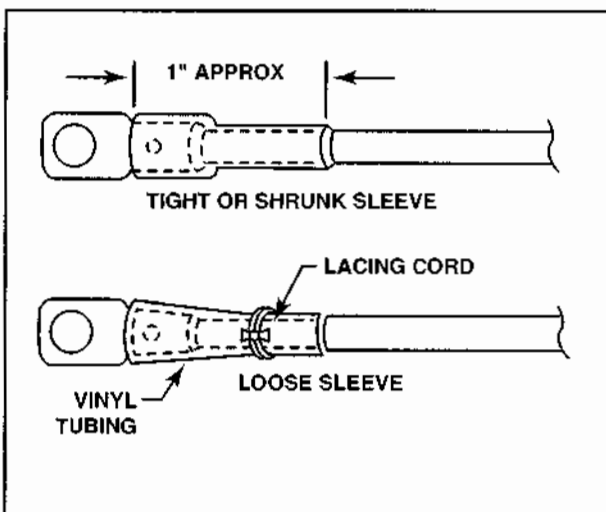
Solderless terminals installed on 10-gauge or larger wire require a separate piece of insulation. You can use heat-shrinkable tubing or vinyl tubing secured with lacing cord.
